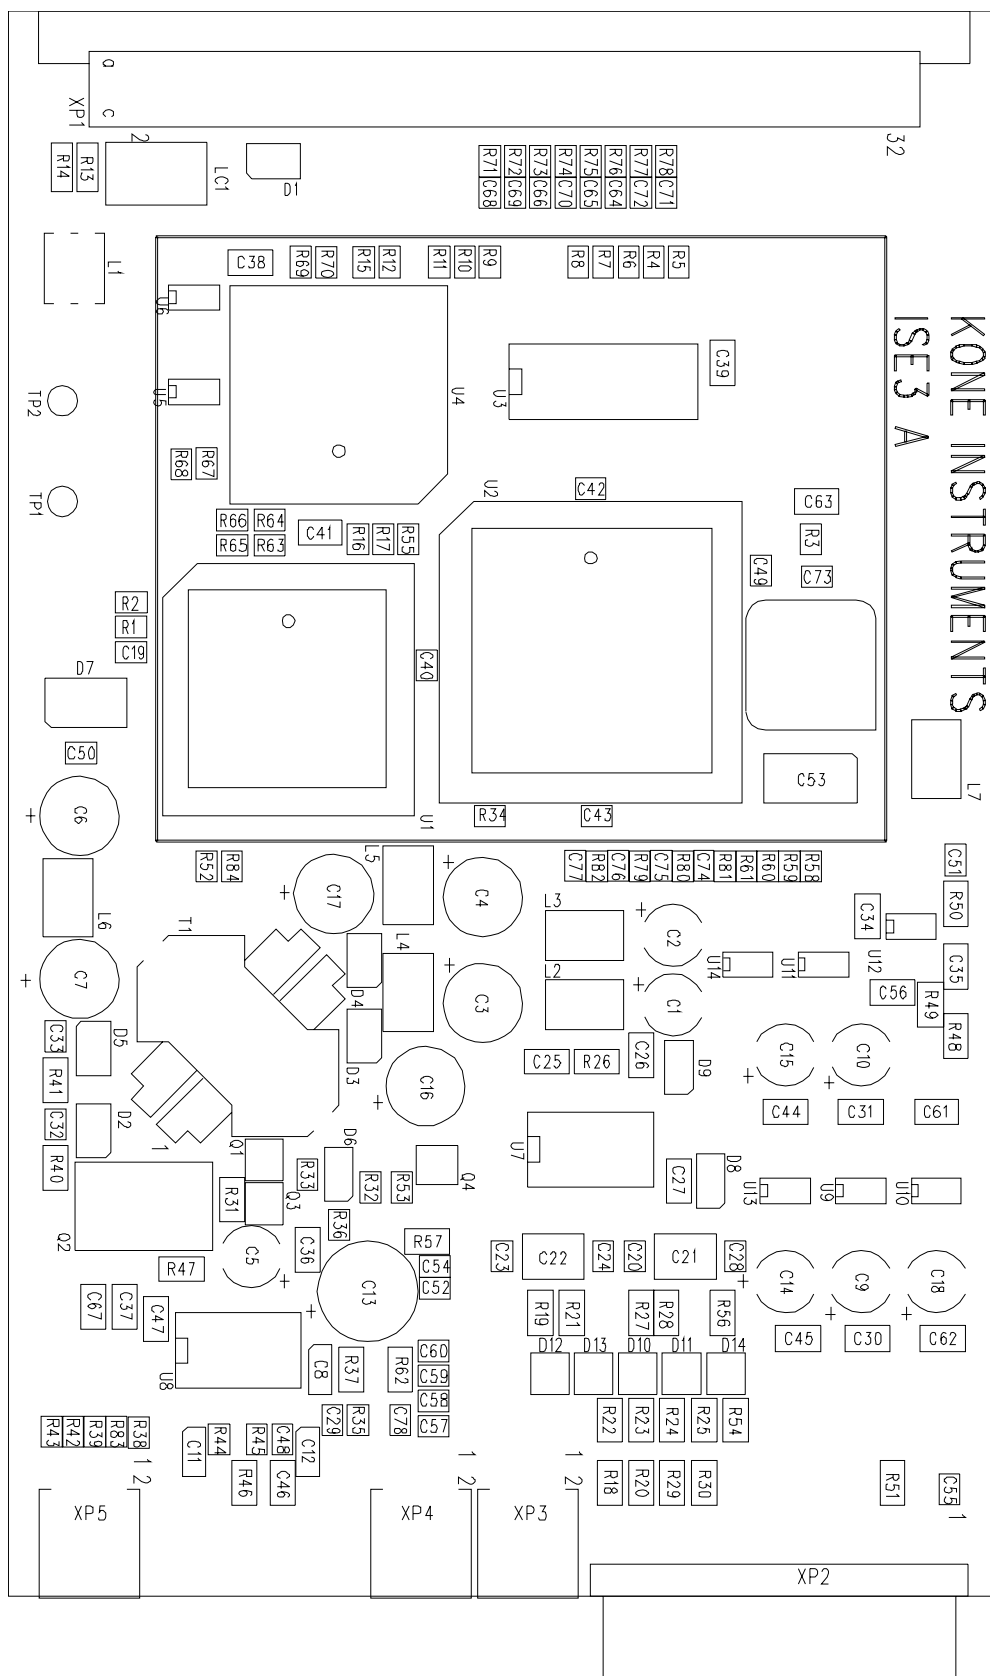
THE COMPONENT LAYOUT OF ISE3
